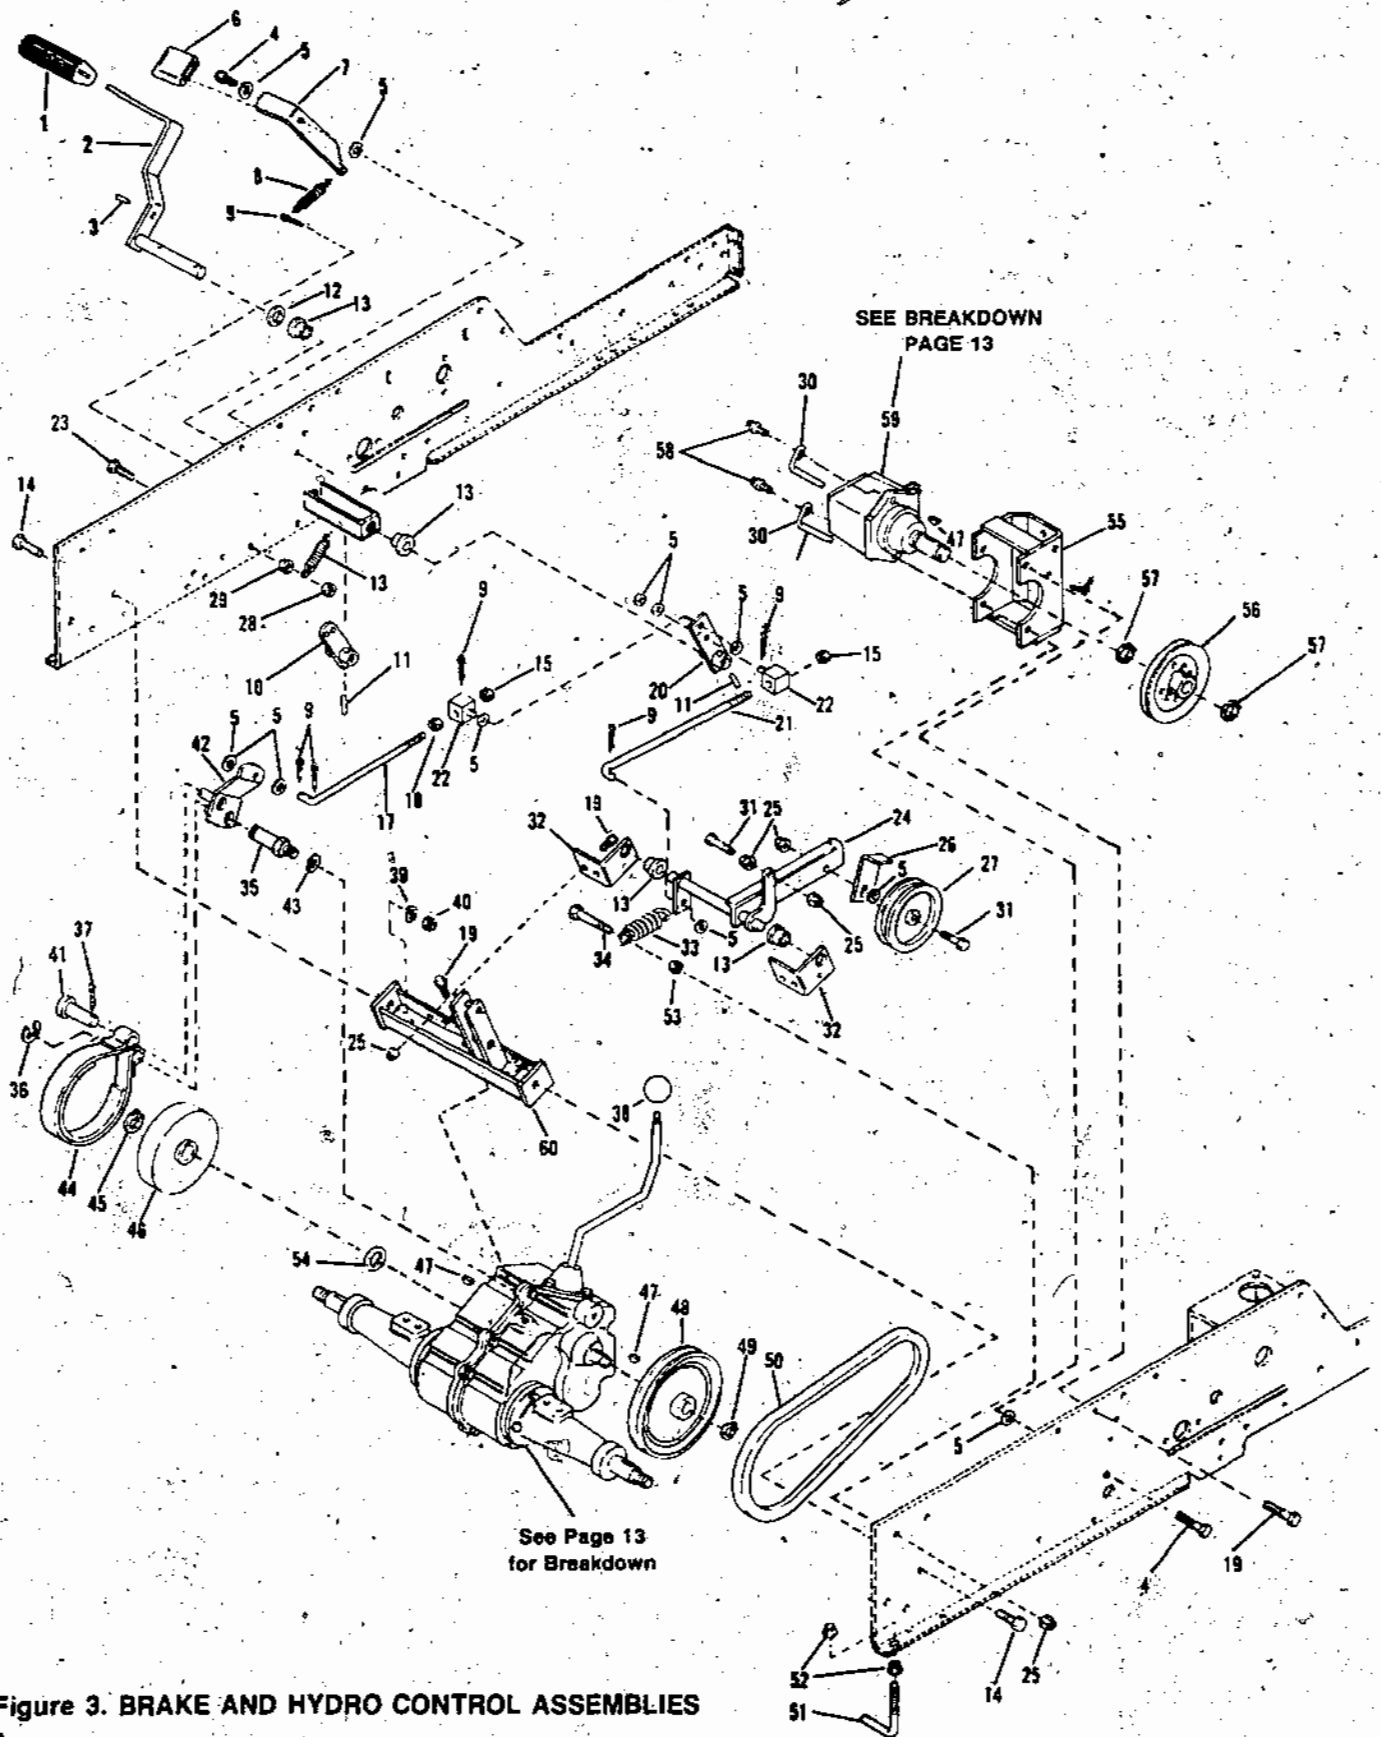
BRAKE AND HYDRO CONTROL ASSEMBLIES
